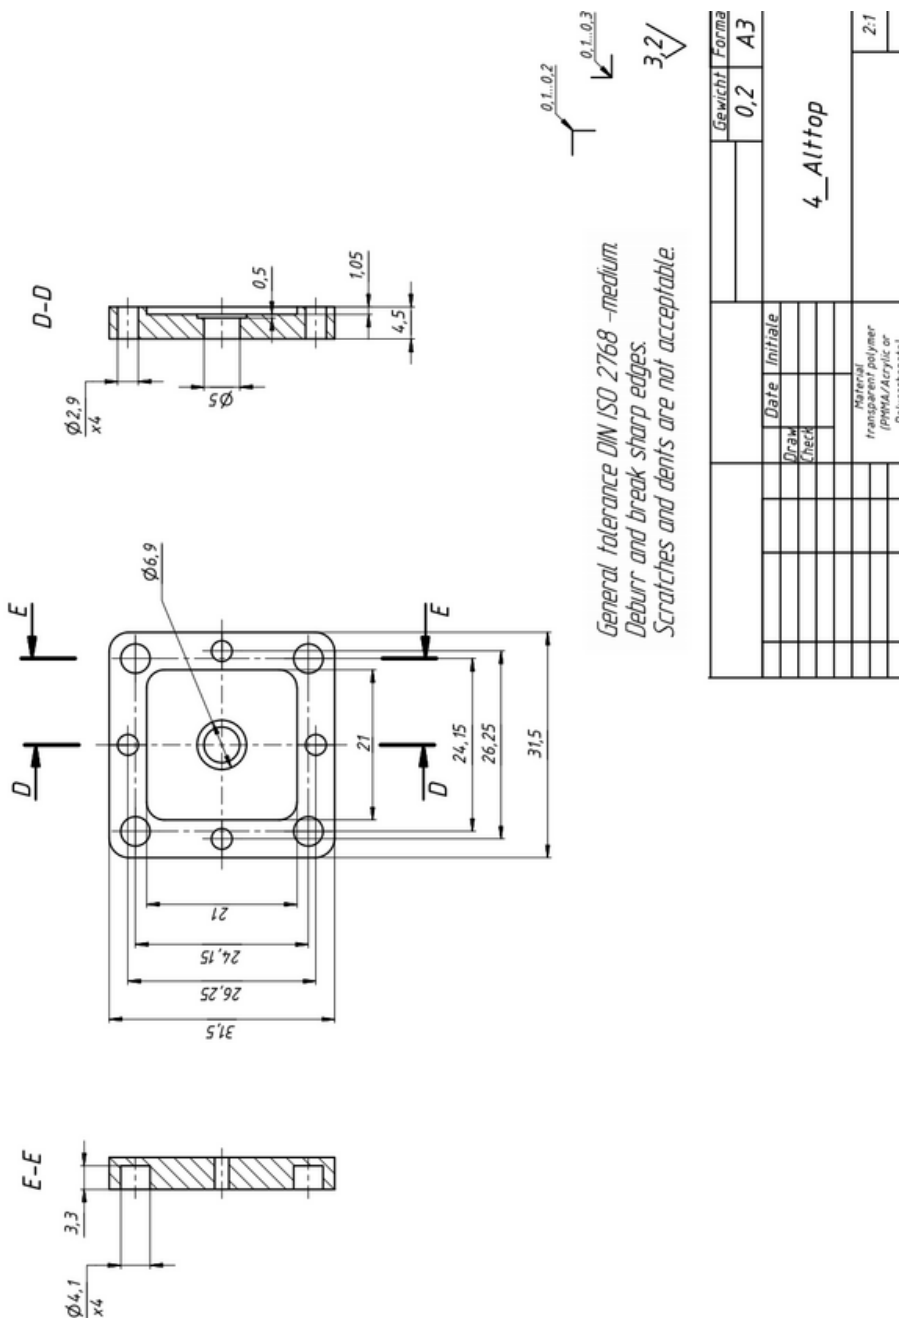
Technical drawing of the skin-on-a-chip cell seeding module
